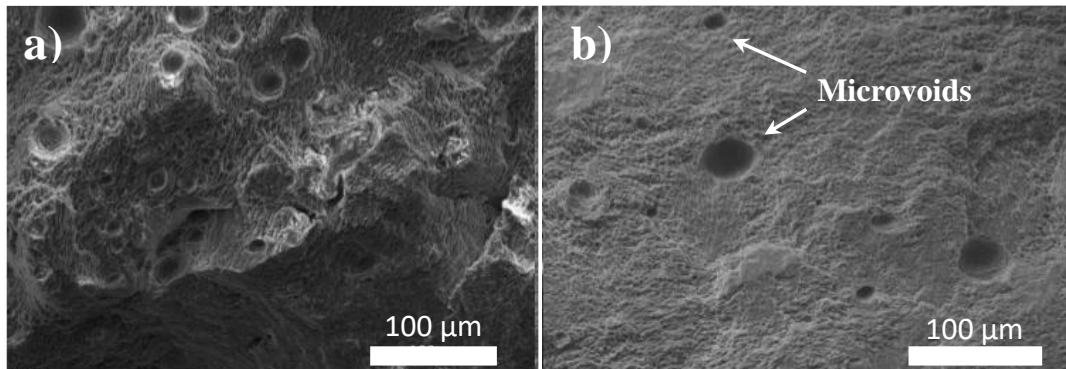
Representative examples of fracture surfaces, (a) Horizontally built sample (b) Vertically built sample
